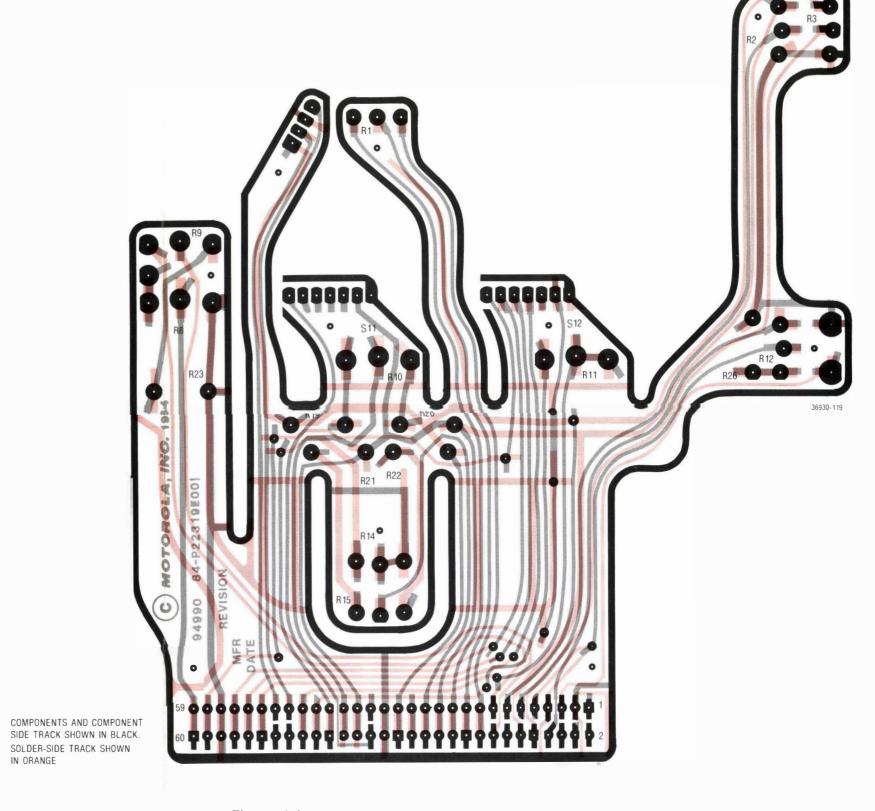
Front Panel Right Flex (Scope) (See Sheet 4, p. 18-9, for Parts List)
